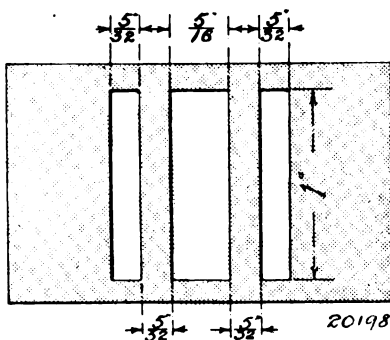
PORTS ACCORDING TO WORKING DRAWING.
